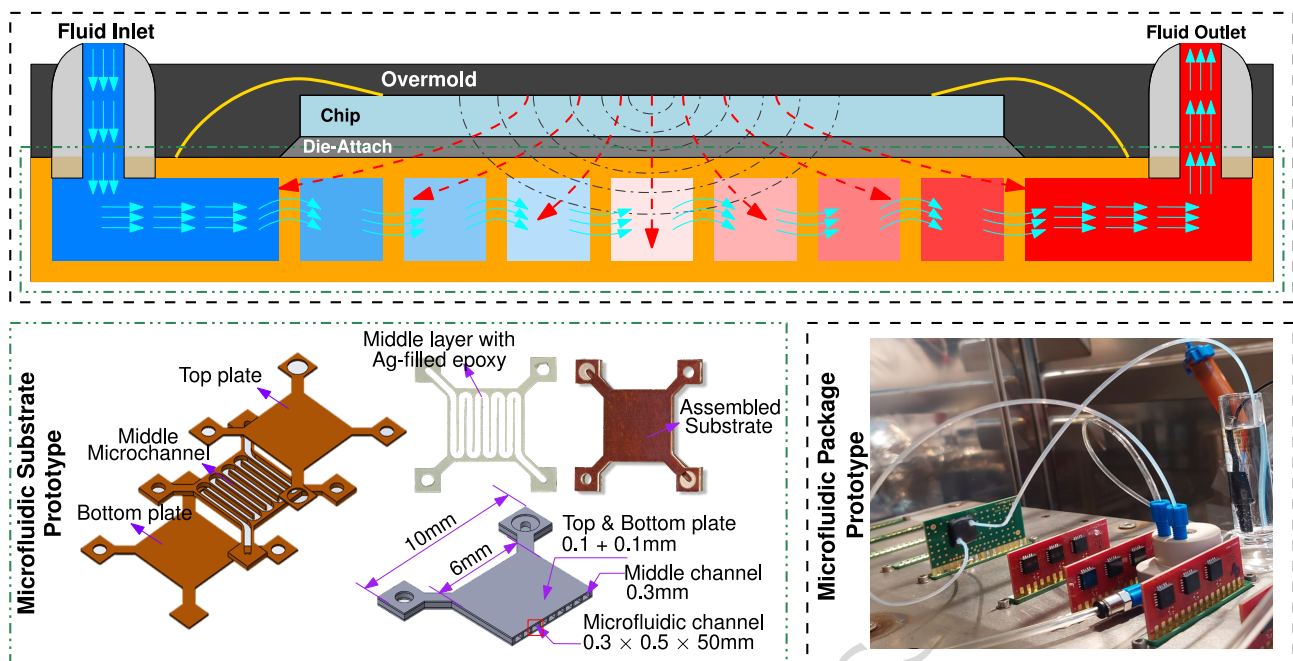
Design and prototype of the direct-to-package cooling concept demonstrated in this study.
